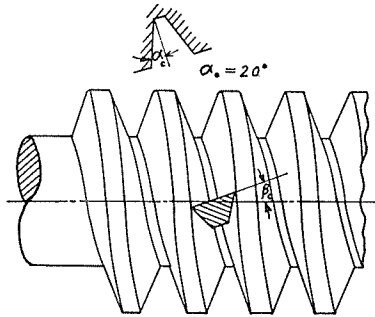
Thread cutting of the type-2 chased worm thread ($\alpha_c = 20^\circ$)
